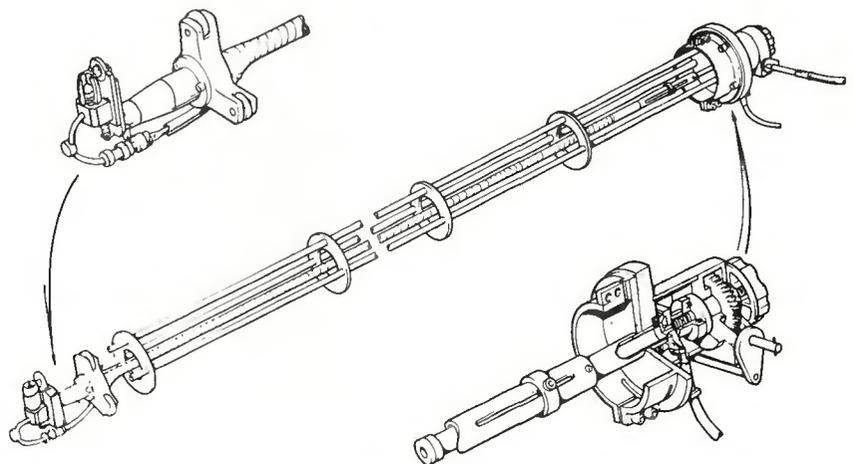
Internal welding equipment for DFR primary circuit repair (Ref. 28)
